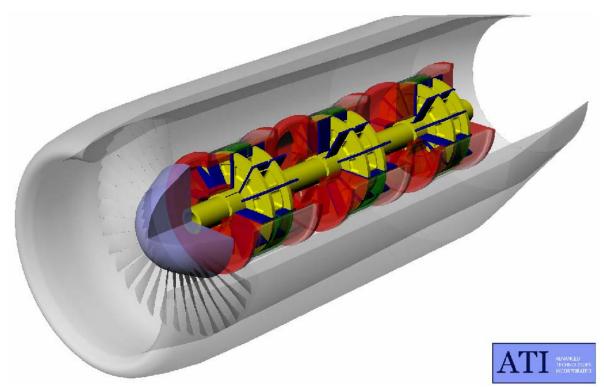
Rendering of the PAX 50 engine with a 3-rotor diesel core engine.
